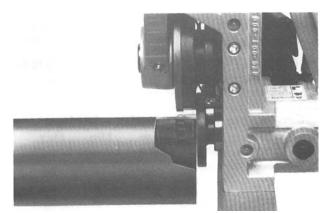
Close-Up of Pipe Against Drive Roll Flange
